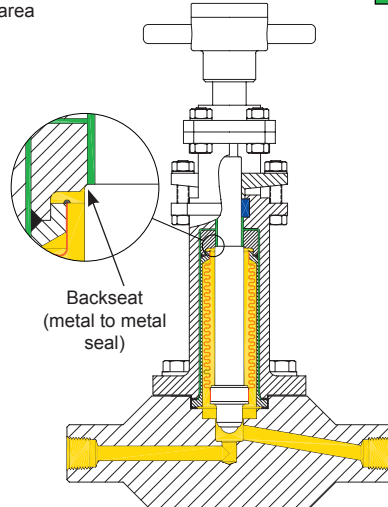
Valve Backseated (bellows rupture, full open position, backseating provides secondary metal to metal seal)
